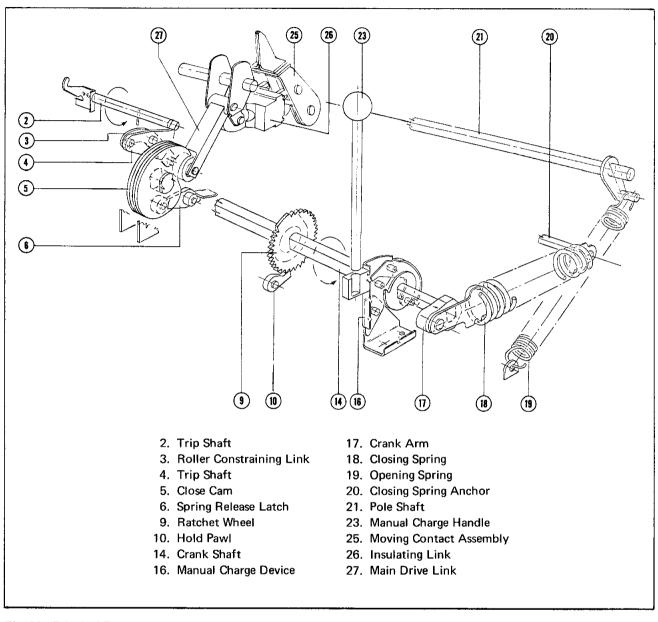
Principal Parts in a Manually Charged Spring Operated Mechanism. Type DS-532 Shown
